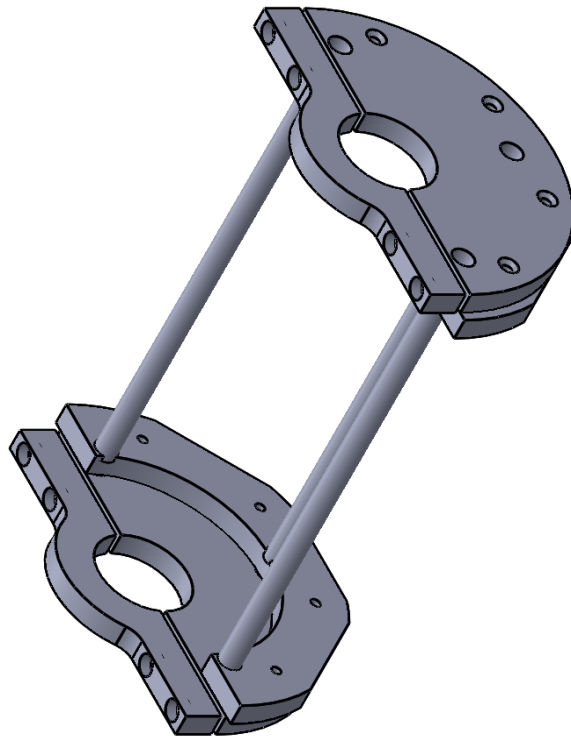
Schematic drawing of polarimeter support cradle part, this is the rod that faces the two sides of the cradle together
